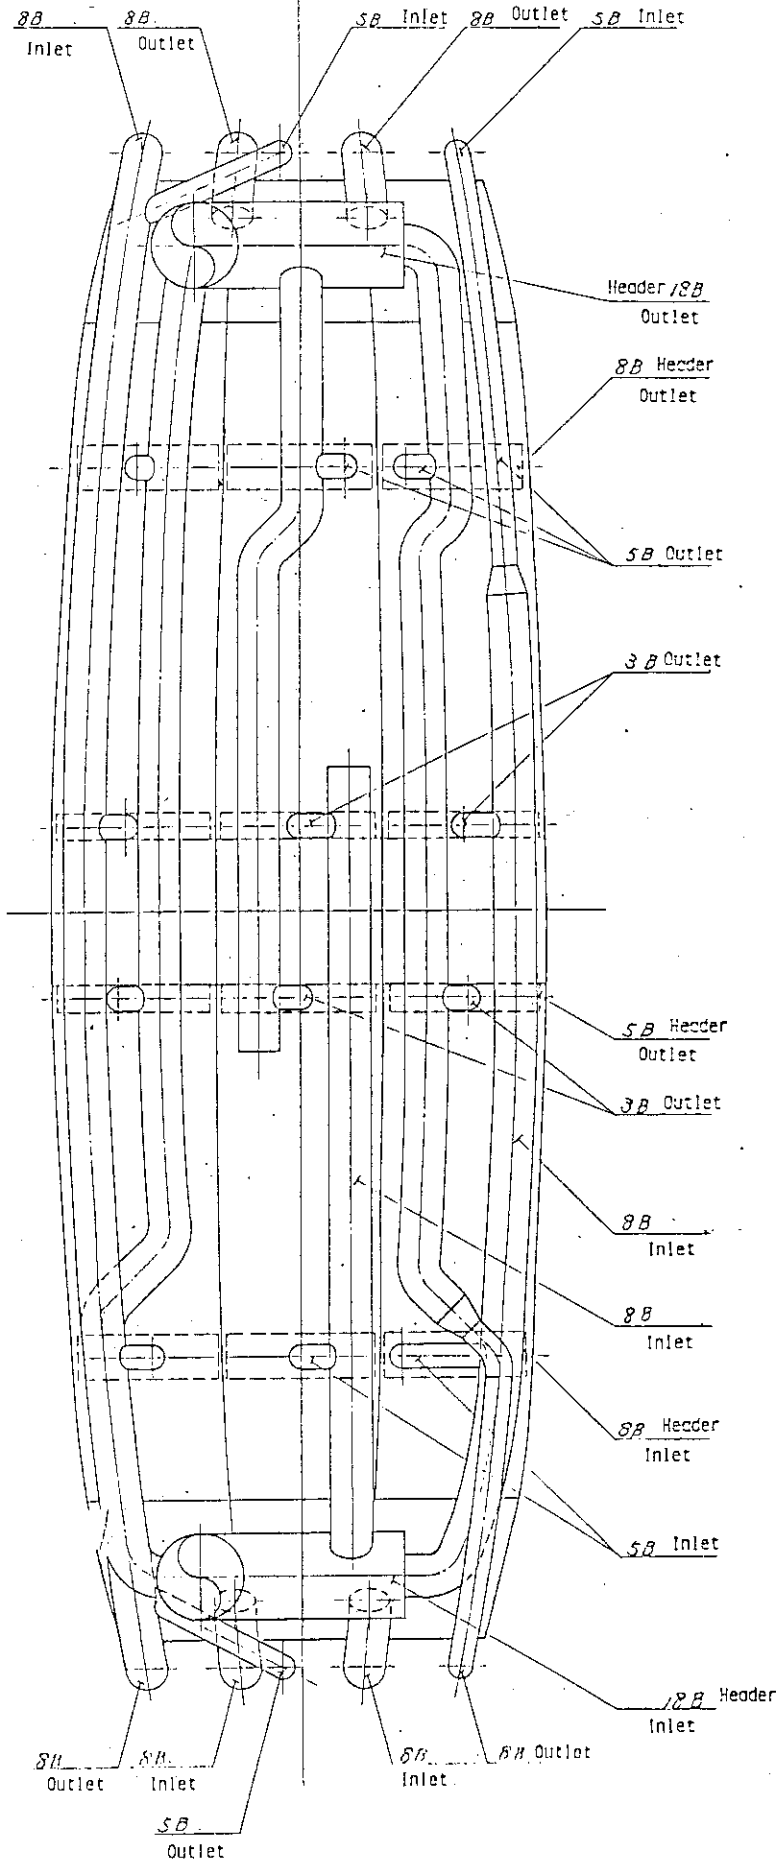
SPTR Power Plant (Side View of Blanket Piping...3 Blanket Type)
